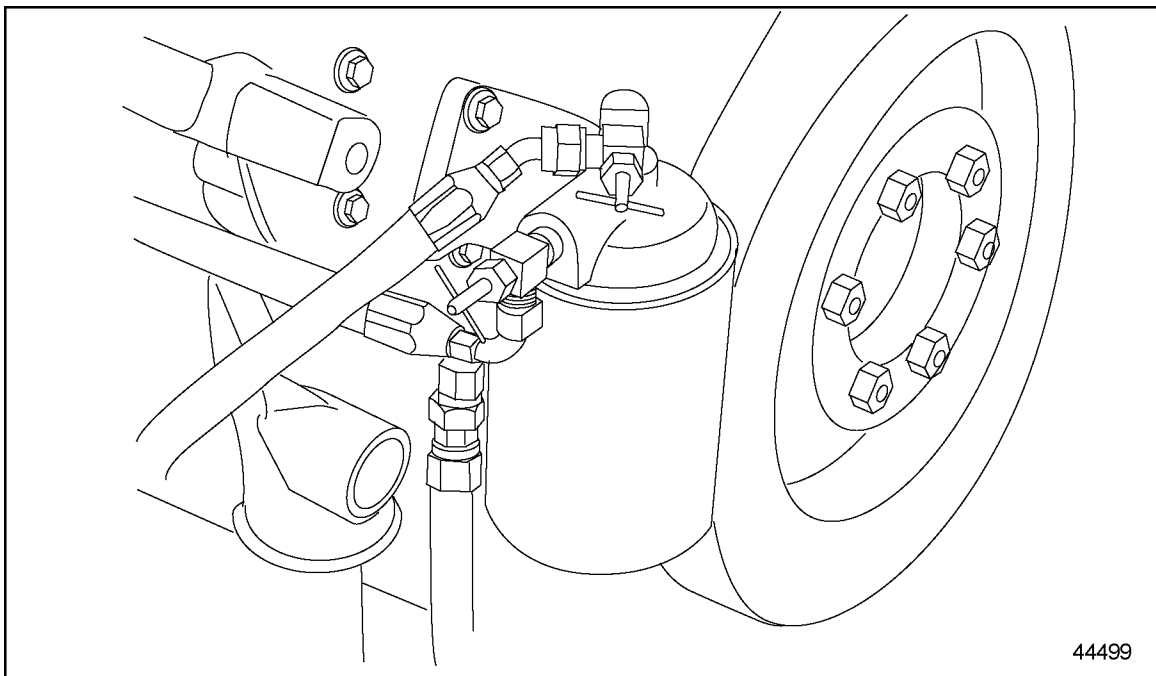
Current P/N: 23533617 Coolant Filter Adaptor Assembly
